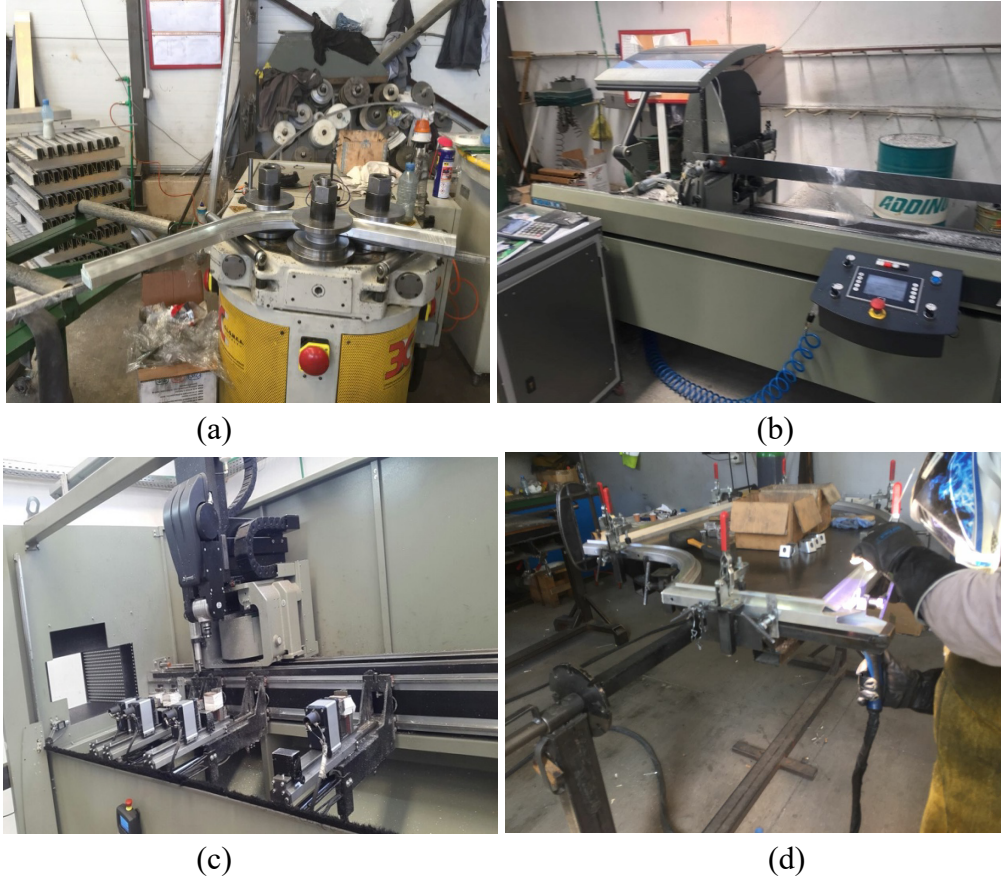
Finishing operations processes, (a) horizontal bending machine, (b) cutting machine (c) milling machine (d) TIG welding process
